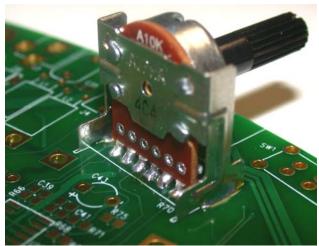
Make sure pot is flush and straight before soldering to PCB.
